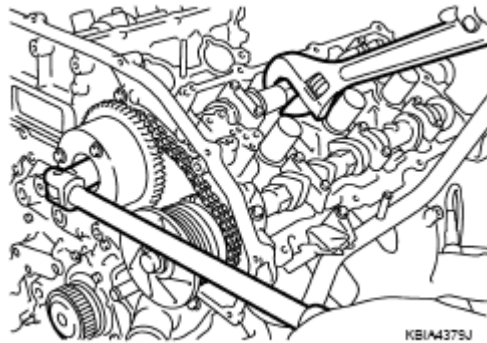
Identifying Intake And Exhaust Camshaft Sprocket Bolt
